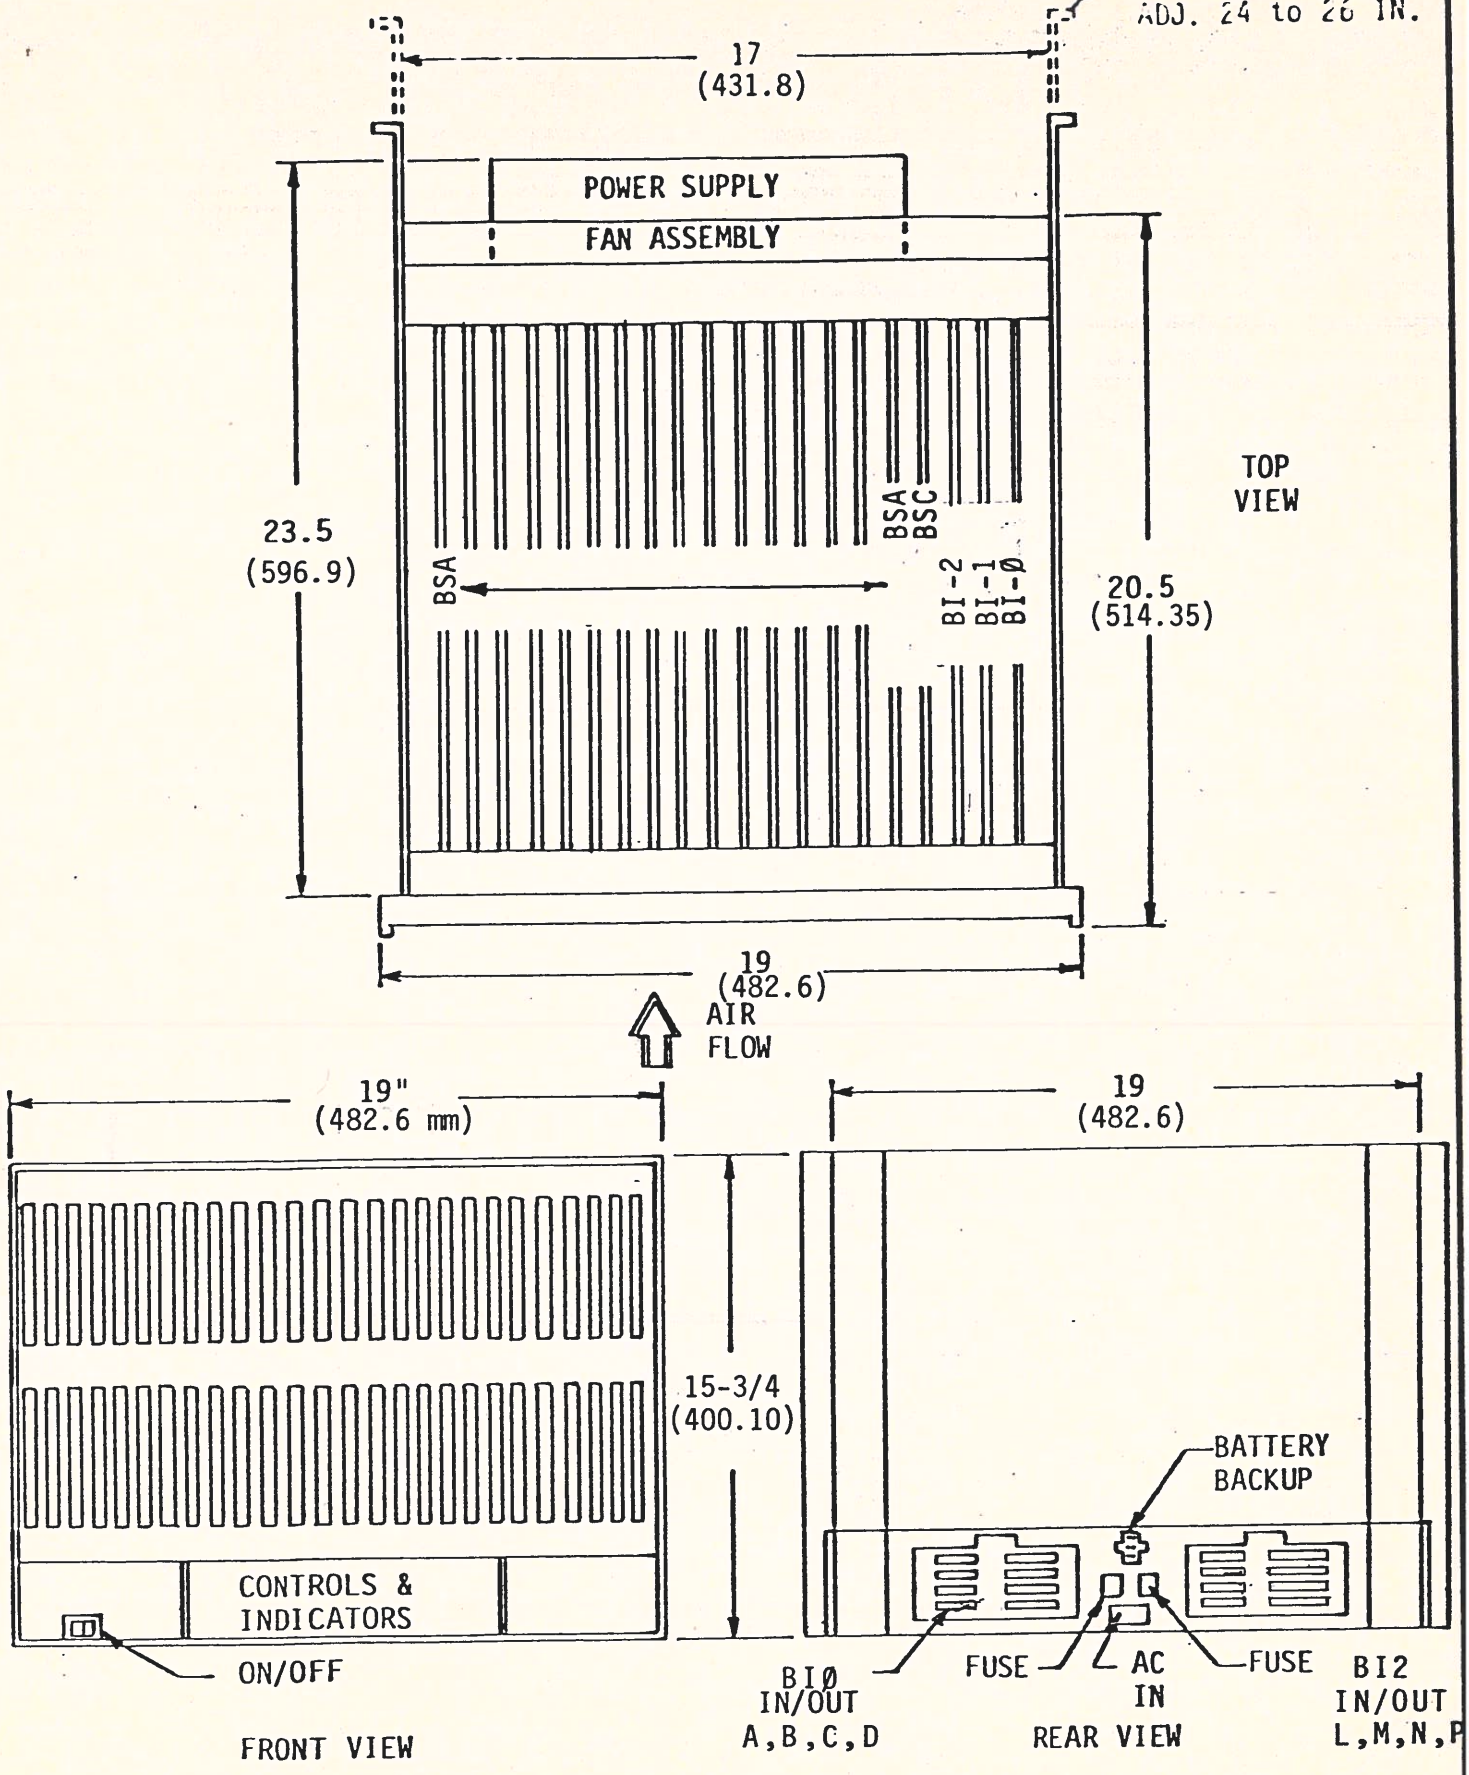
BS-101/102 15 3/4-INCH CHASSIS - OUTLINE DIMENSIONS
